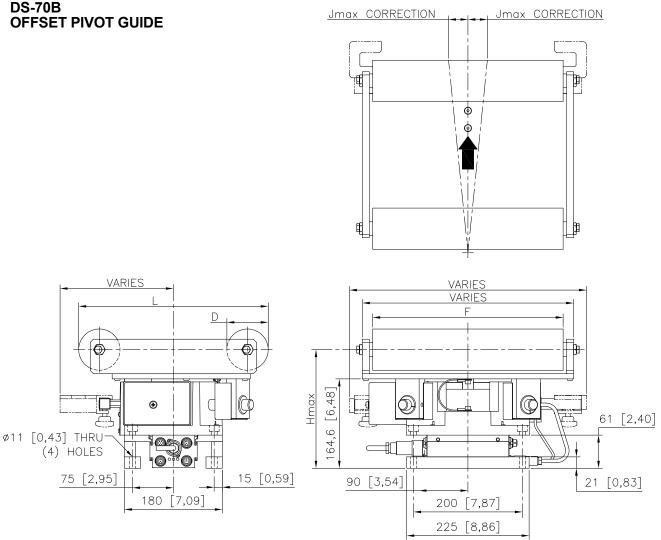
DS-70B WITH PROCESSOR AND INTEGRATED SENSOR MOUNTING Dimensions are mm [inches]
